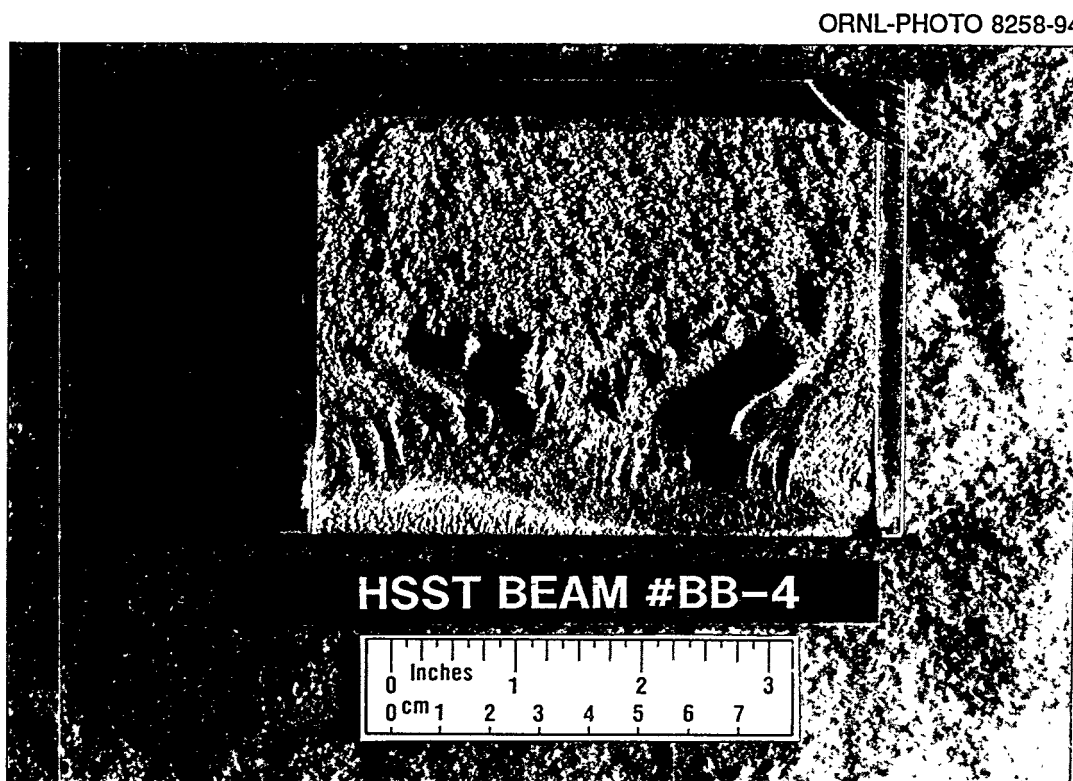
Fracture surface for shallow-flaw cruciform specimen BB-4 with fracture initiation site indicated
